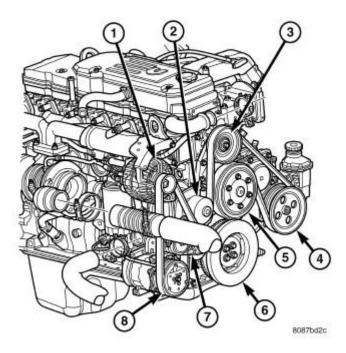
Accessory Drive Belt & Driven Components Courtesy of CHRYSLER GROUP, LLC
